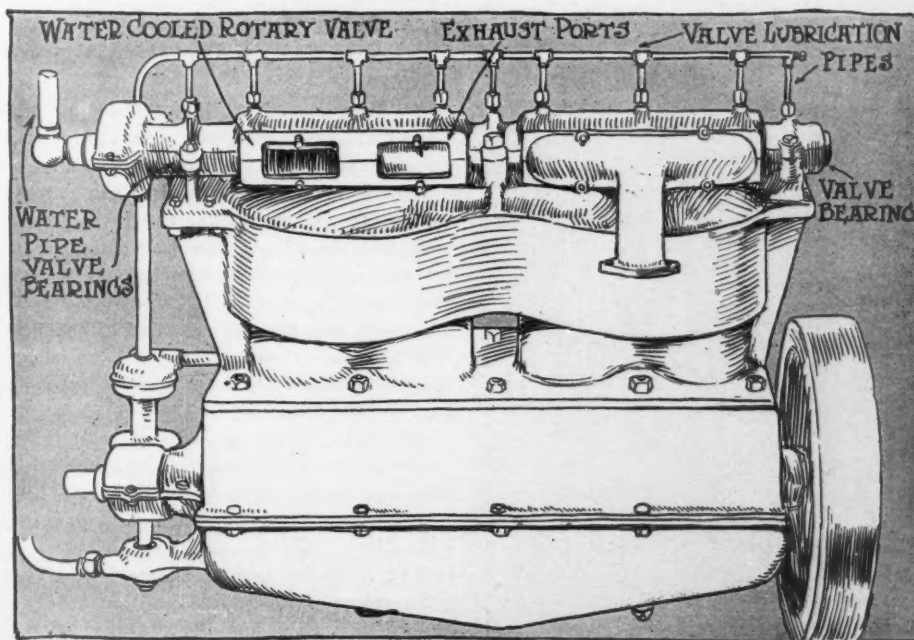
THE LEWIS ROTARY-VALVE GASOLINE MOTOR
